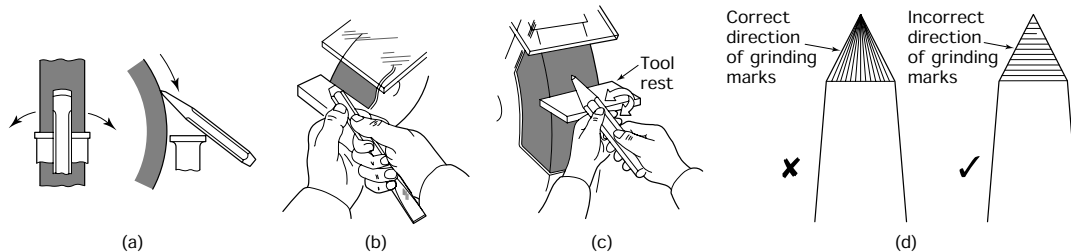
Sharpening bench tools: (a) sharpening a cold chisel – the cutting edge should be slightly radiused by rocking the chisel from side to side as indicated; (b) removing a ‘mushroomed’ head; (c) sharpening a centre punch; (d) correct grinding of centre punch point
